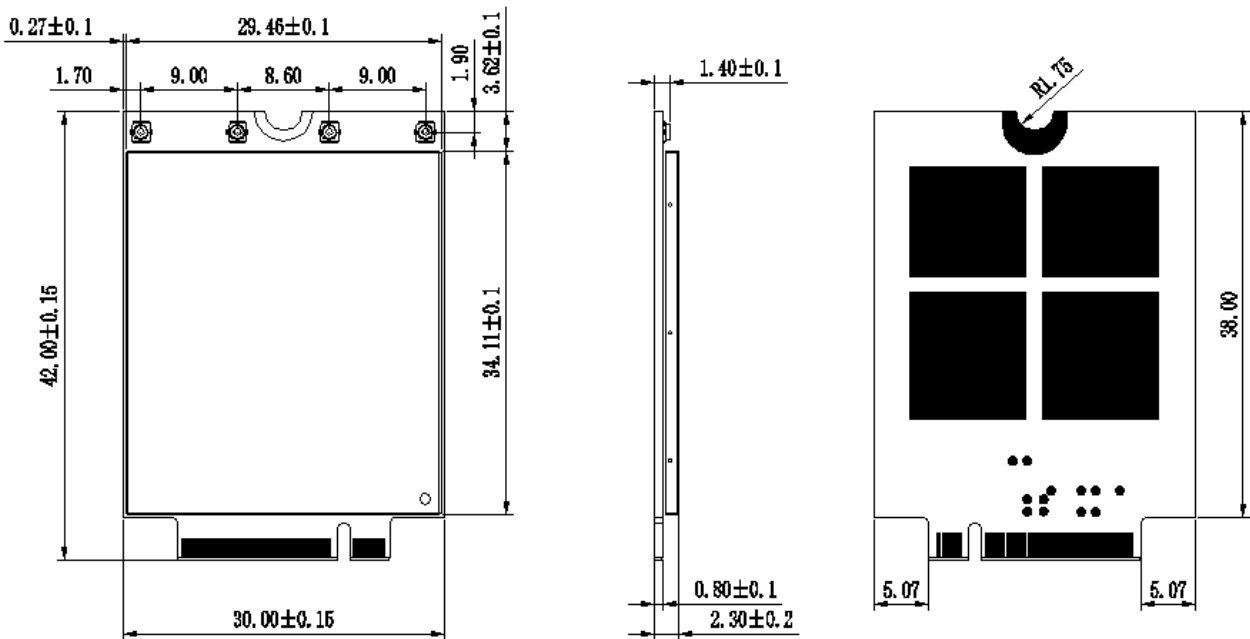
Mechanical Dimensions of the Module (Unit: mm)
